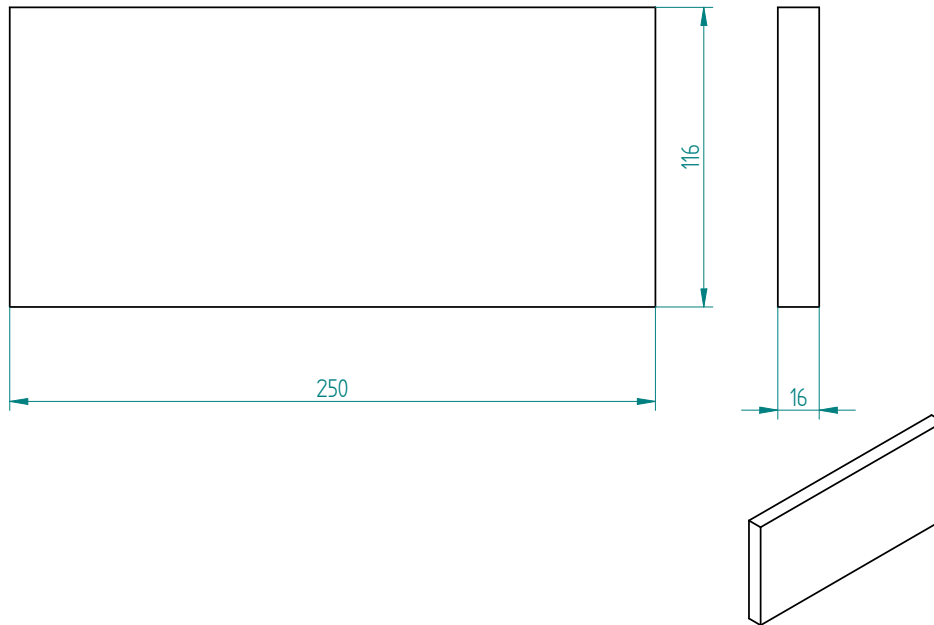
Shaped part : face-2-outsourcing for perpendicularator tool
